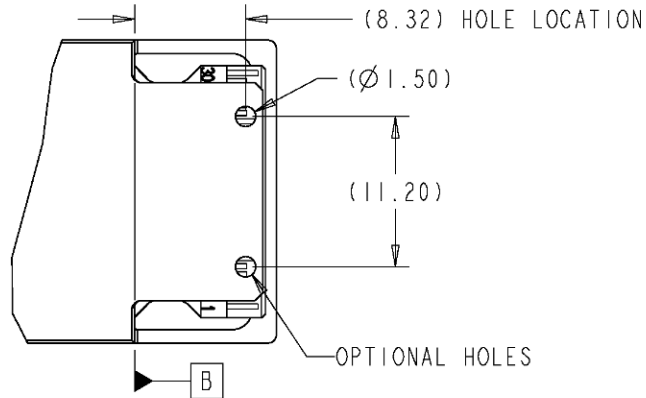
OSFP nose, bottom view, optional signal pad inspection holes
